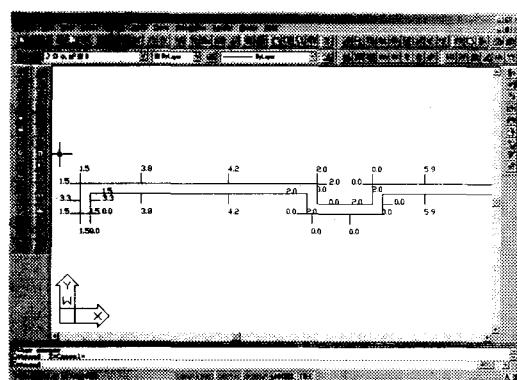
Zoomed on AutoCAD graphic drawing (rail shape)
